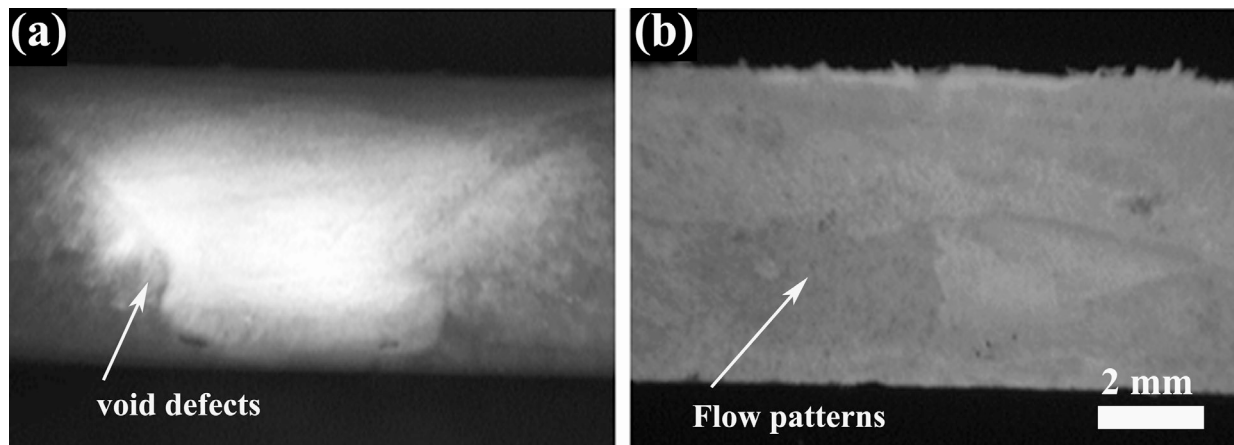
Macrostructure showing the appearance of the friction-stir welded AA6061 joints at 1400 rpm (a) without water cooling, and (b) with water cooling.
